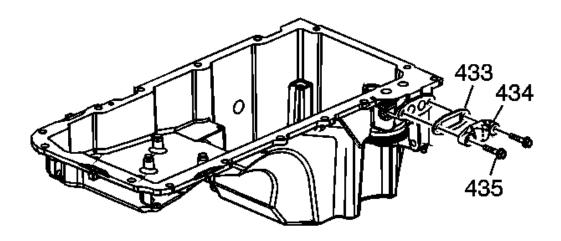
View Of Oil Pan Cover, Bolts & Gasket Courtesy of GENERAL MOTORS CORP.
